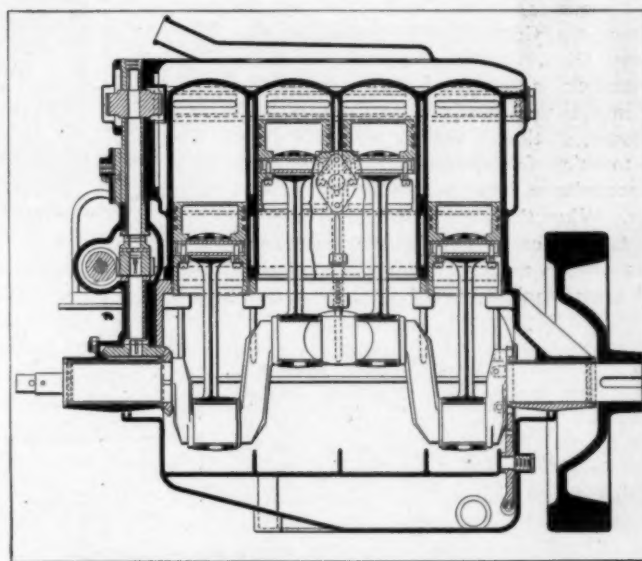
Sectional side view of the Mead motor, showing the bevel driven vertical shaft and the two bearing crankshaft
